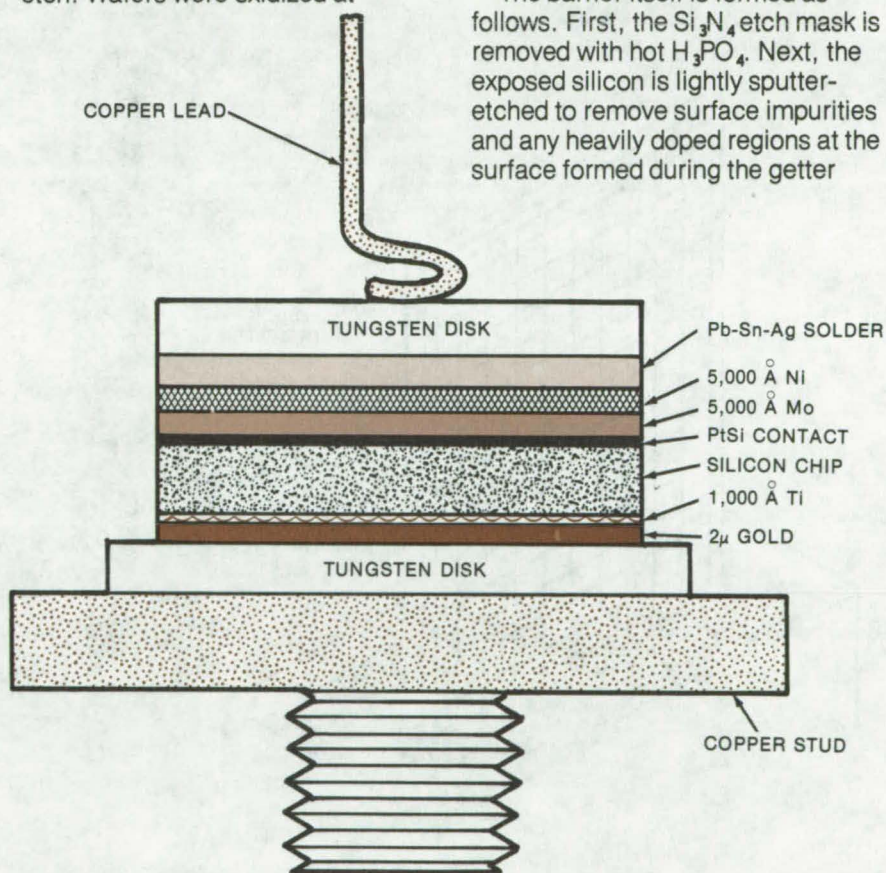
The Assembled Diode is eutectic-bonded between tungsten backup plates and is mounted to a copper header and lead-in wire. The entire assembly is soldered together in one step.
